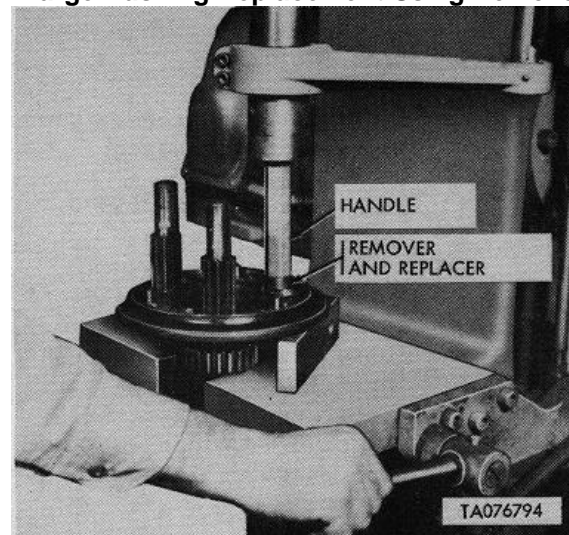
Axle Housing - Small Bushing Replacement Using Remover and Replacer with Handle
